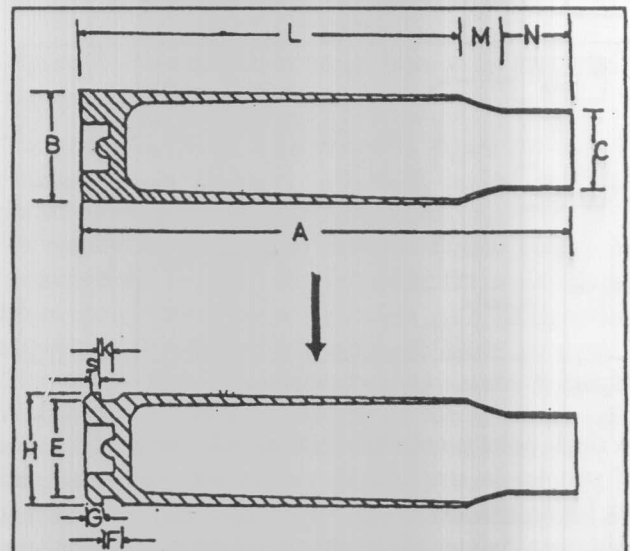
Final manufacturing stage showing the end product inspection parameters.
